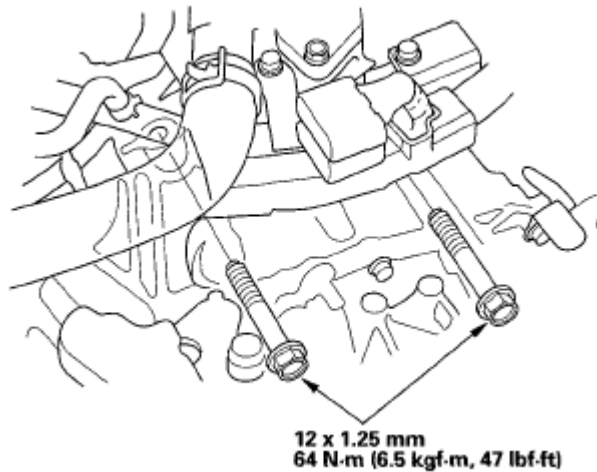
Identifying Upper Transmission Mounting Bolts With Torque Specification
